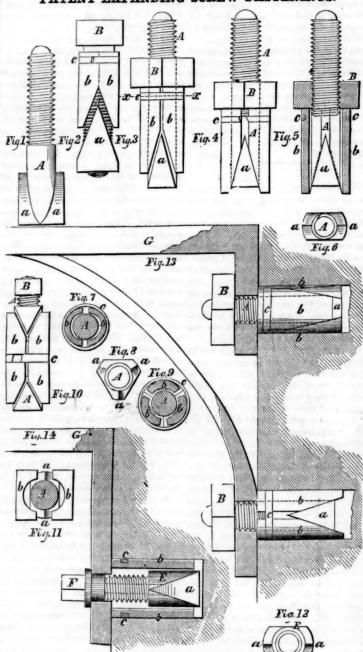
is a view of a screw bolt, A, with wedges, a a, on its head, but its nut and expanding jaws are removed. The form of the wedges, a a, are shown in figs. 1, 2, 3, and 6, the latter being an 'e wd view of fig. 1. A, fig. 2, is a common screw bolt, the nut, B, being its head. The wedge, a, is a hollow piece with a thread inside forming a nut, and the end of the bolt works in it, so that by turning round the head of the bolt, the wedge, a, will be forced up into the wedge recess in the jaws, b b, as the screw of the bolt is forced down. The expanding jaws, b b, form a centrally divided small cylinder, and when drawn close together, they fit so as to work freely on the bolt. They are cut away beveling on opposite sides, as shown in fig. 4, to fit the wedges, a a. The wedges extend up the sides of the bolt far enough to terminate in a point, and thus allow the head to be made small and give a great breadth of bearing to the expanding pieces. A small groove is formed around the expanding pieces, b b, to receive a thin steel split ring, c, for confining them together, and yet allow them to expand, as shown in fig. 4-an outside view-and fig. 5, a section. When the nut is unscrewed and the collar or jaw loosened, this ring contracts the collar, and allows it to be removed. This would be very difficult to accomplish without this ring. The application of this ring is shown in fig. 7, which a section in the line, x x, fig. 3. B, figs. 3, 4, and 5, is a nut of the common kind. The expanding jaws, b b, form a collar to the screw bolt, and they must be of a proper size to fit the opening in which it (the fastening) is to be placed.
